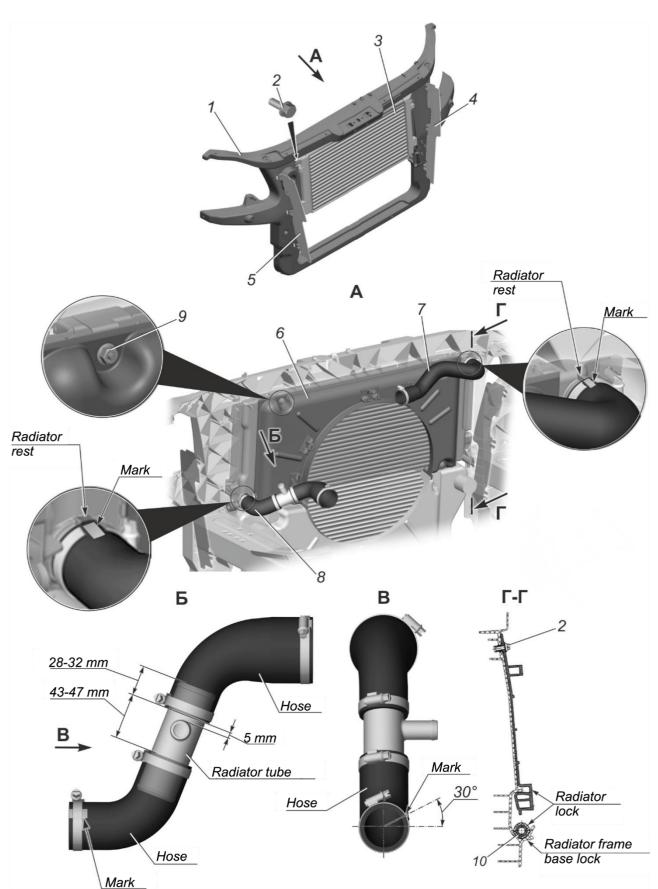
Cooling system radiator installation: 1 – radiator frame base (frontend); 2 – bolt; 3 – radiator; 4, 5 – seals; 6 – upper fan shroud; 7 – hose; 8 – lower hoses; 9 – nut; 10 – pad;
